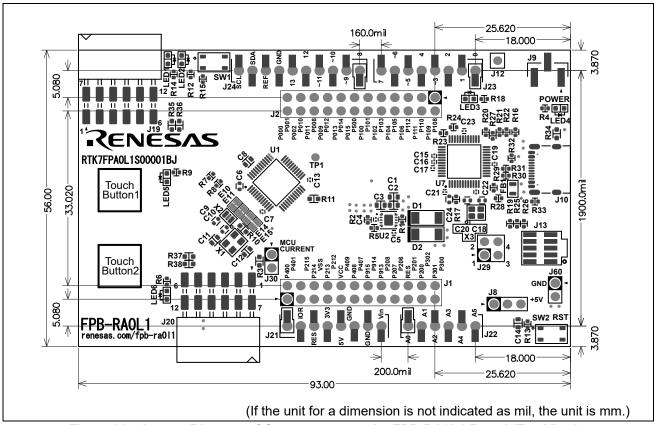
Layout Diagram of Components on the FPB-RA0L1 Board (Top View)
